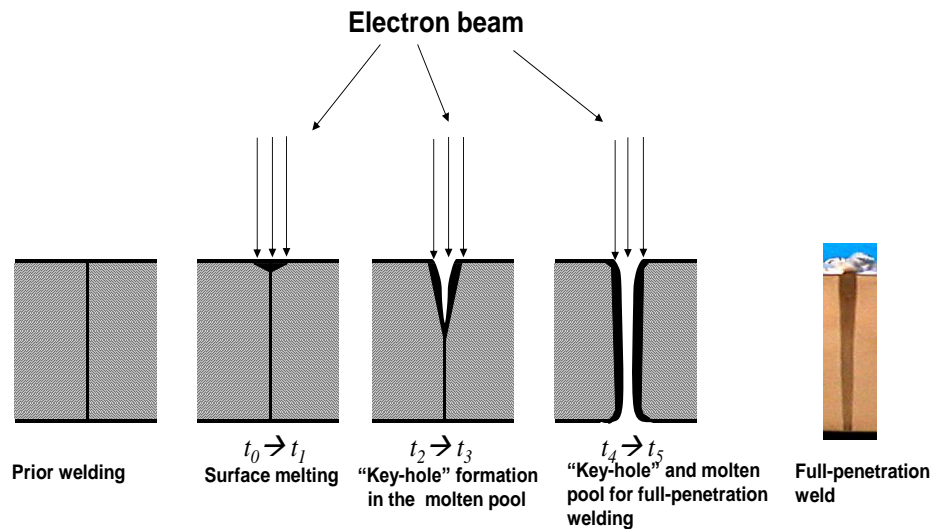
The kinetics of molten pool and cross-section of full penetration weld
